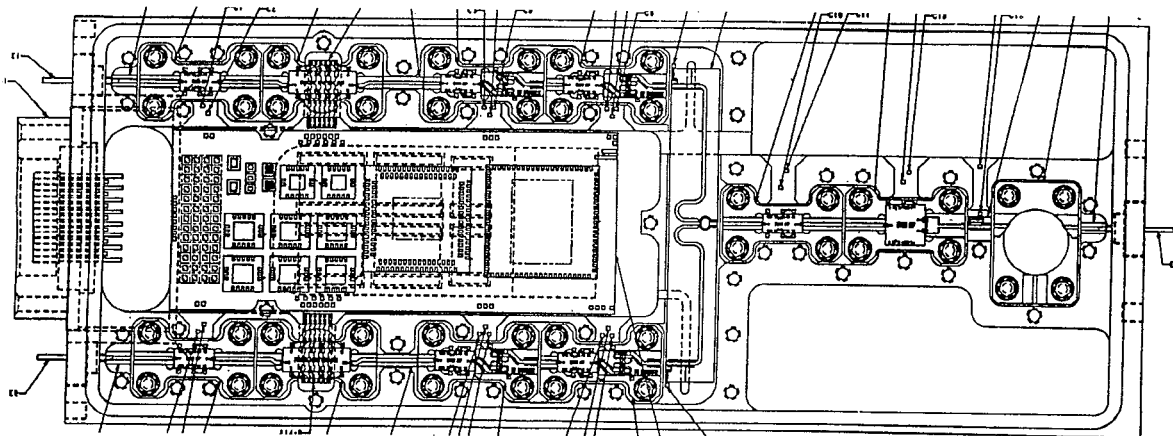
20 GHz Power MMIC Module Assembly Drawing
